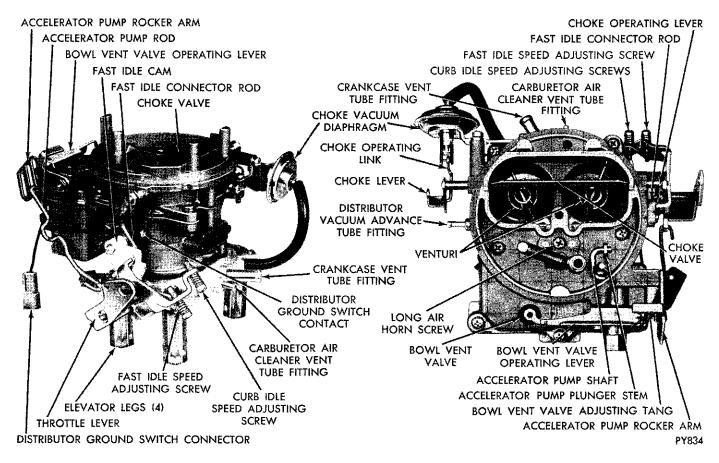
Carburetor Assembly (Holley 2210 Series)
